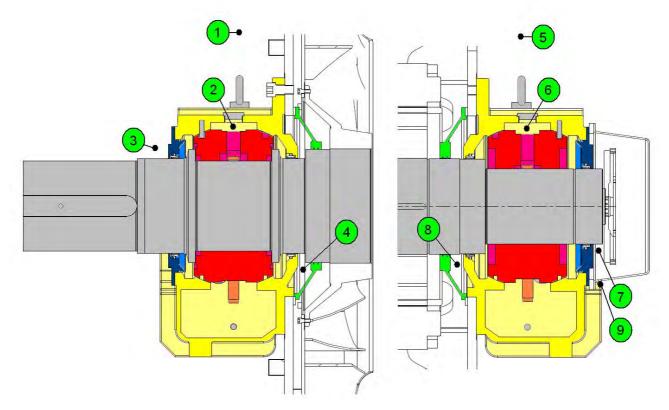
CHECKING THE AIR PRESSURE INSIDE AND OUTSIDE THE SLEEVE BEARING (1 - SLEEVE BEARING COVER)
